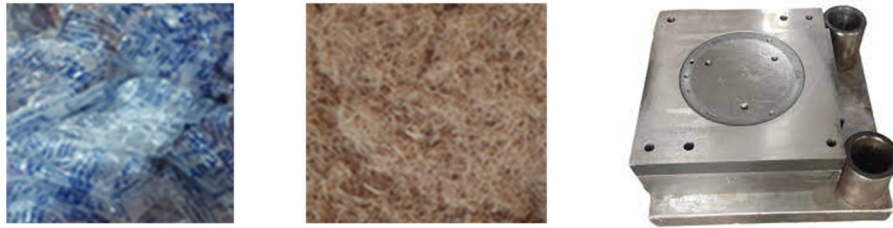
General the materials – LDPE matrix, Coconut Coil Fibres, Metallic Mould
